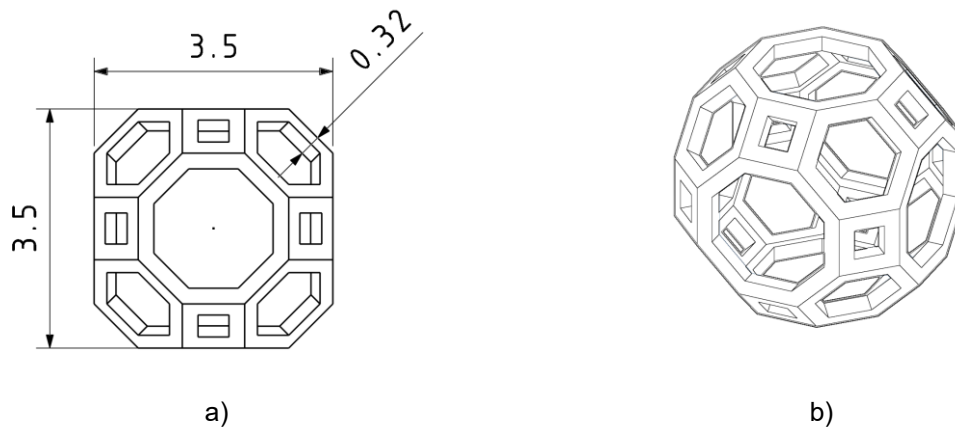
Unit Cell a) technical drawing; b) isometric view.
